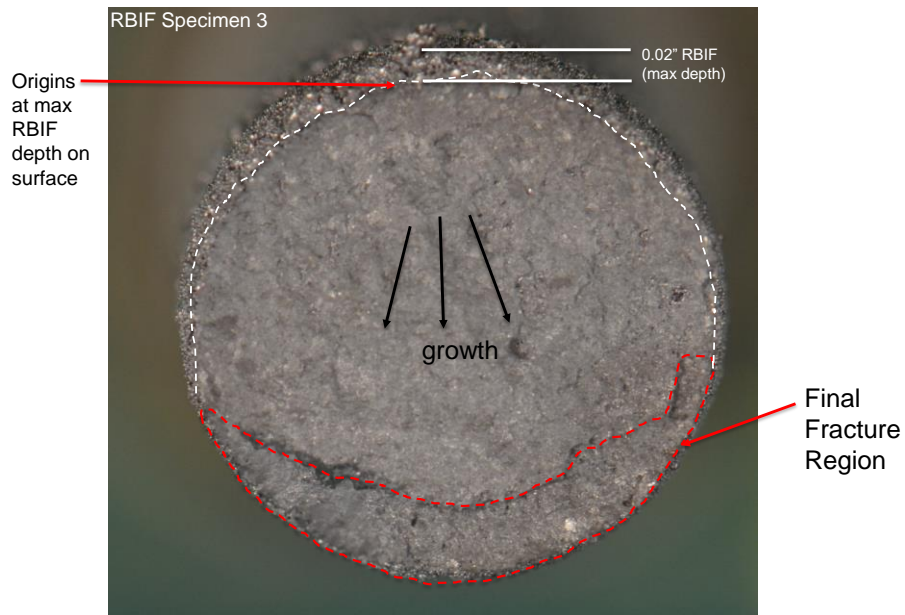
Fracture Surface Photograph of RBIF Specimens 3 ~10X Magnification
